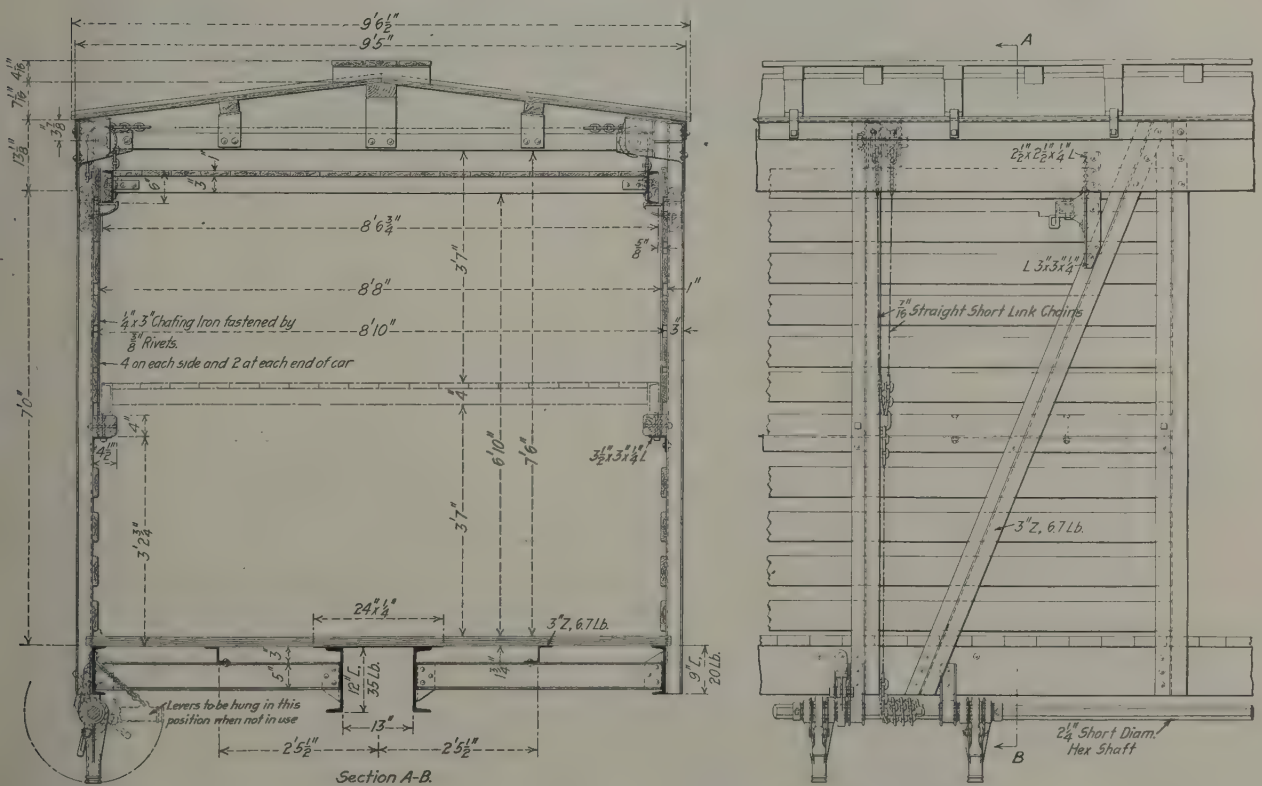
Sections Showing Door Operating Mechanism of Santa Fe Stock Car.
